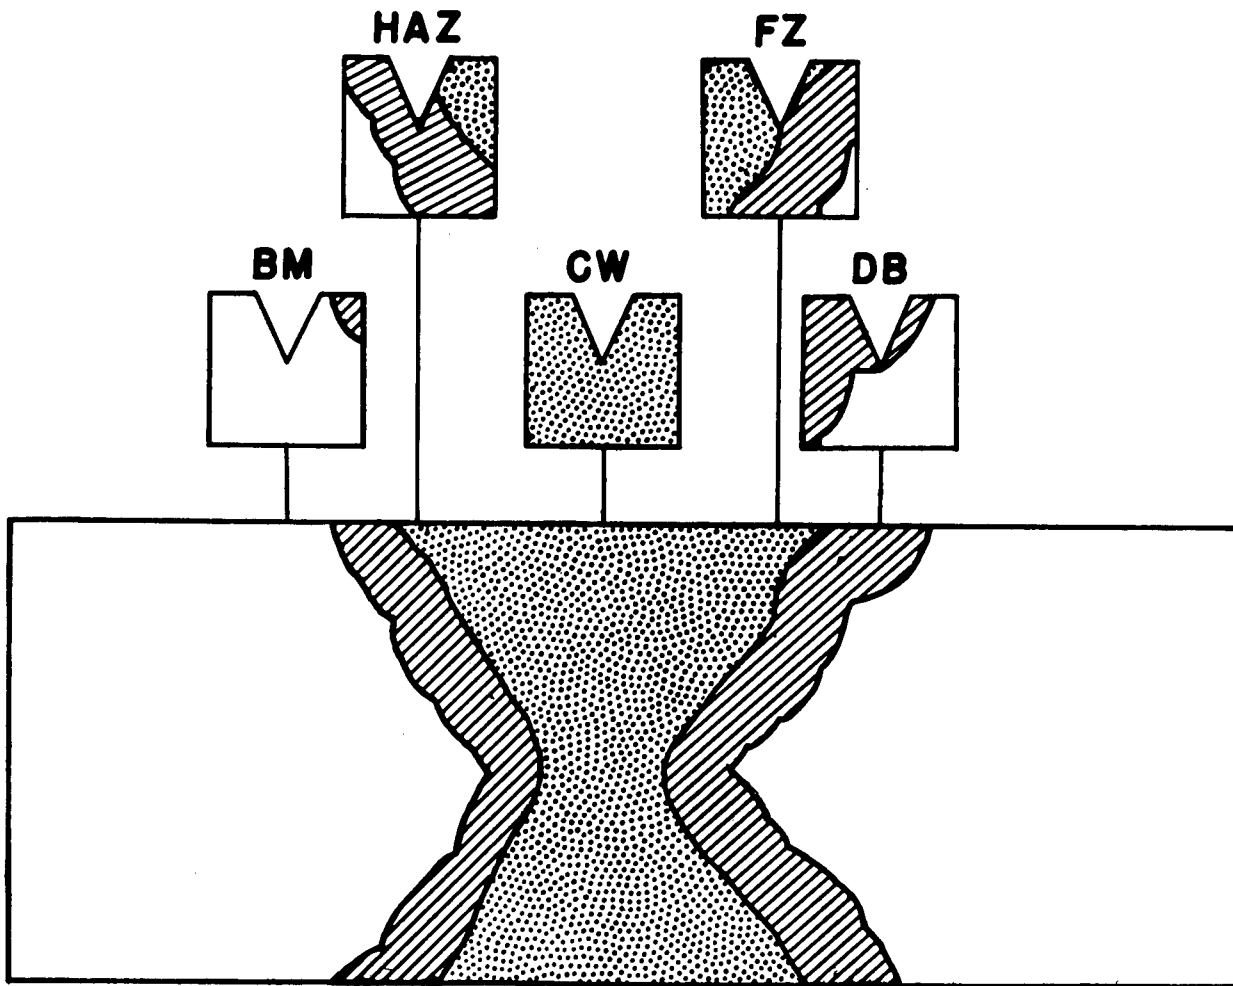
Cross section of weld area showing different locations of starting notch tipped with fatigue crack.
